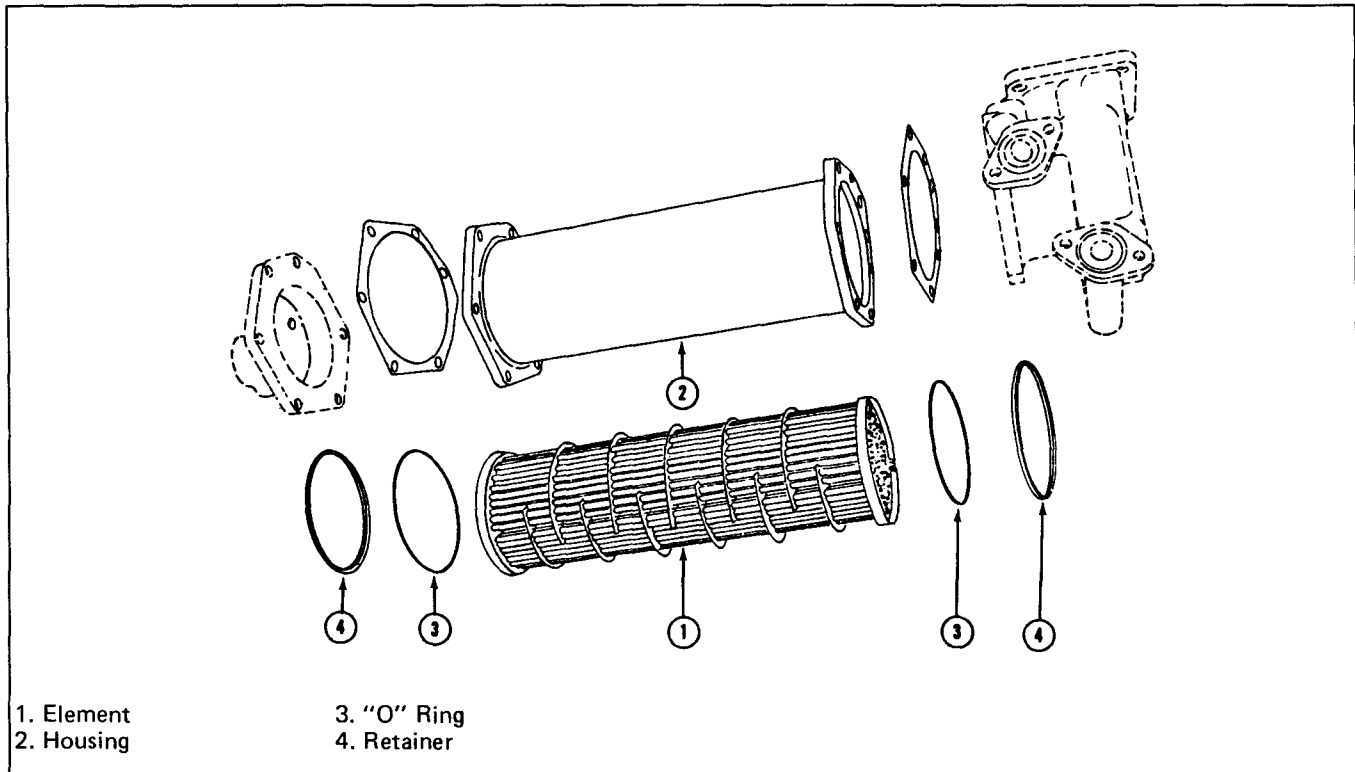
, (N10741). Lubricating oil cooler — exploded view
